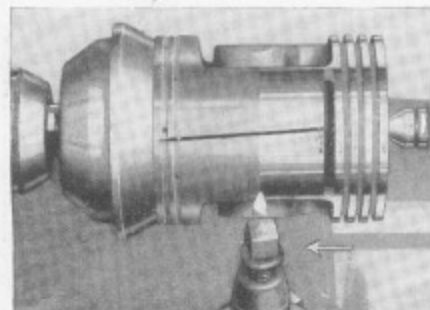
Semi-Machined Pistons of all Types are Finished Quickly in the Lathe.
